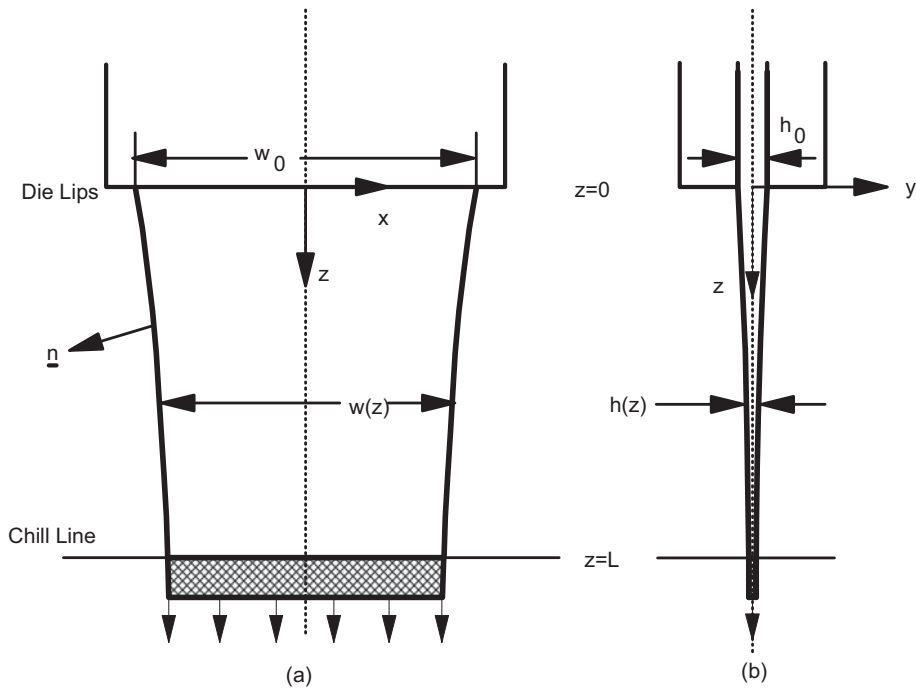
(a) Geometry of the front view of the film-casting process. The polymer film between the die and the roll is called the web. (b) Side view of the film-casting process.
